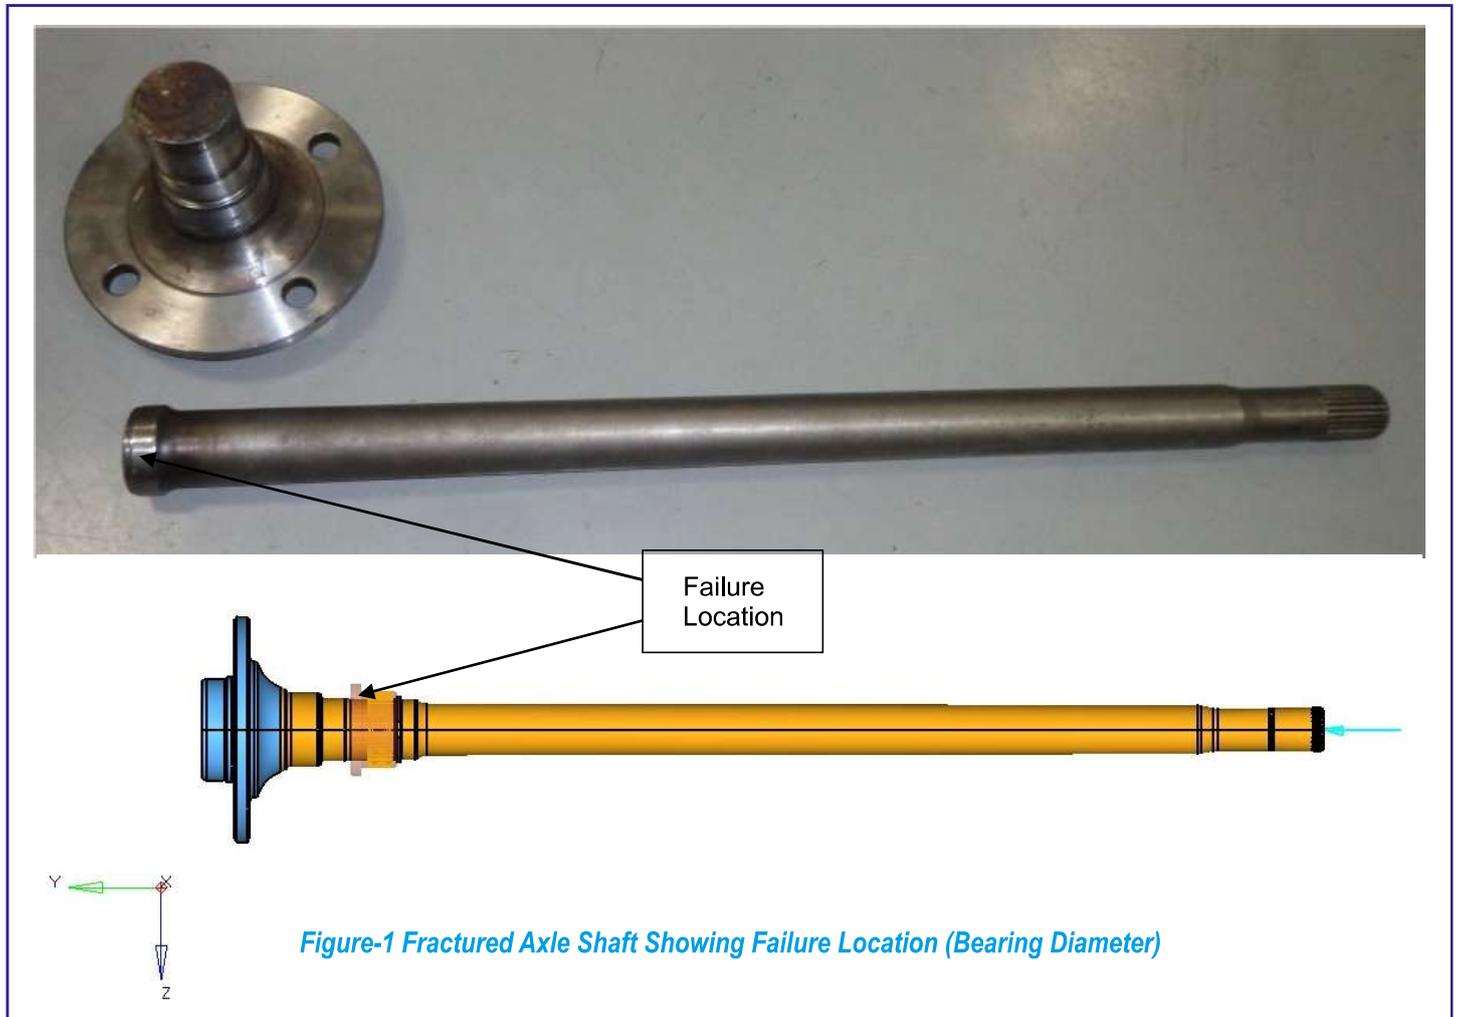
Fractured Axle Shaft Showing Failure Location (Bearing Diameter)
